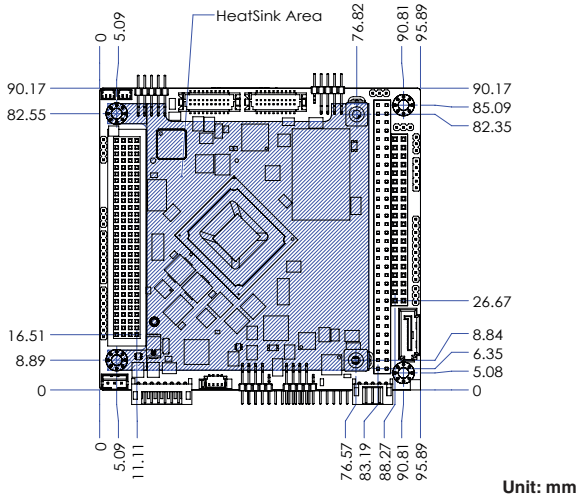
PCM-3365 Mechanical Drawing (Top Side)
